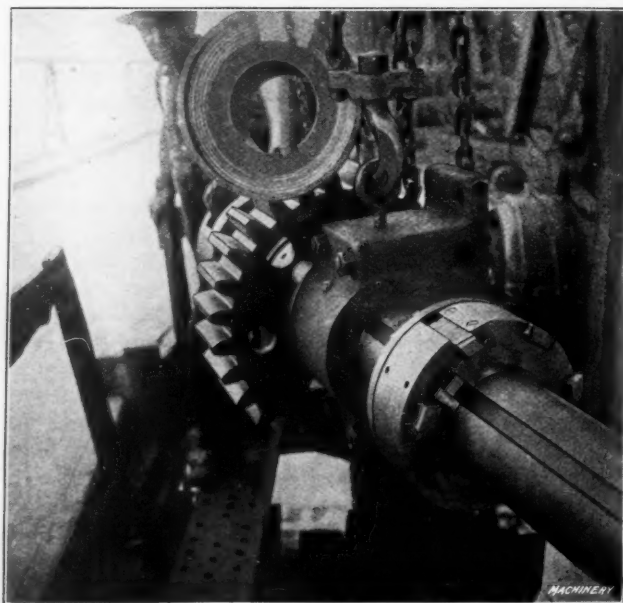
Boring-bar and Cutter-head equipped with Seven Tools
